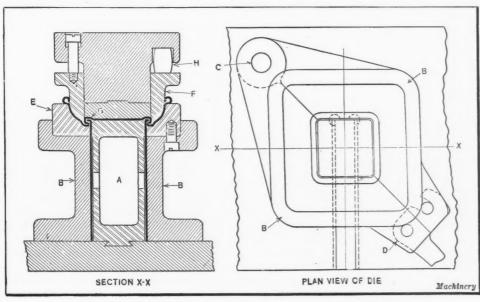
Hinged Die employed in assembling the Bottom to the Grinder Body
